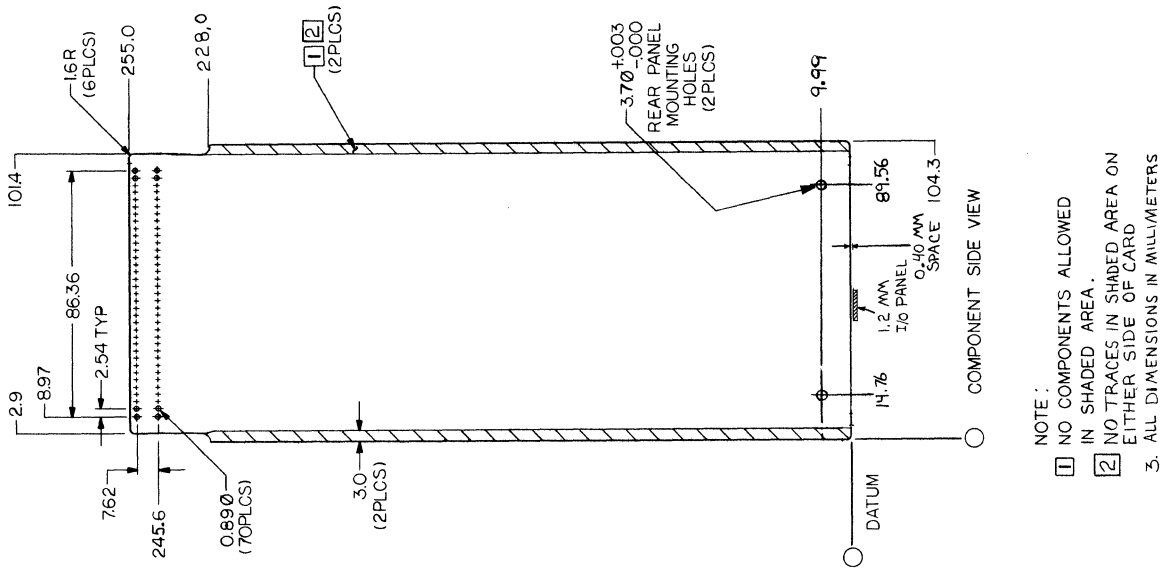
Board Blank Drawing With I/O Panel (Accessory Card Details)
